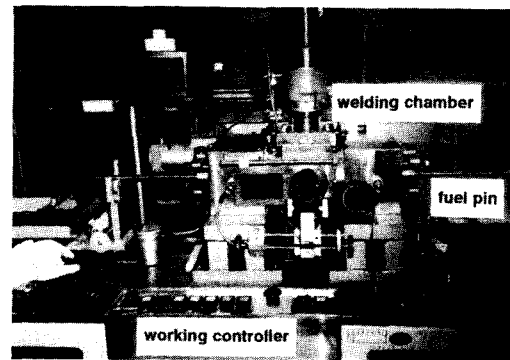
Welding chamber and CNC controller for GTAW
